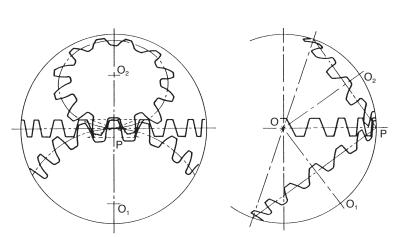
Meshing Bevel Gear Pair with Conjugate Crown Gear
